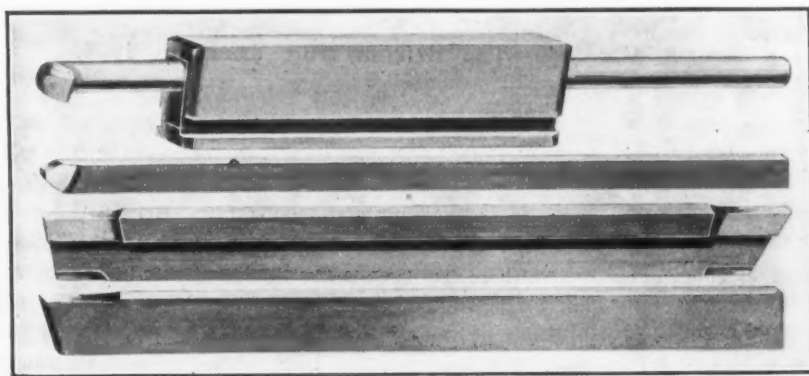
The Tait Universal Tool Holder and Tools Made by the Van Doren Mfg. Company, Chicago, Ill.
